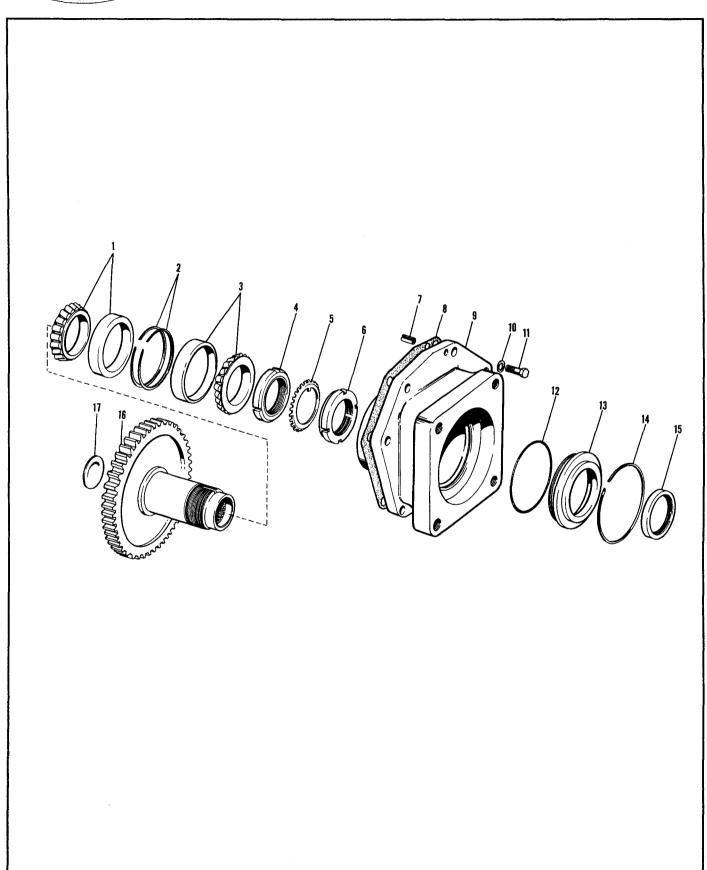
SAE "D" Power Pump Mounting Group of Parts - Exploded View.
